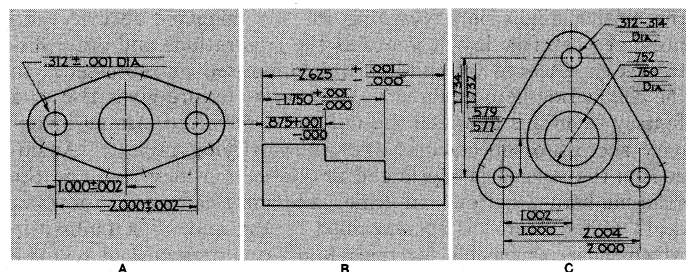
THREE METHODS OF INDICATING TOLERANCES: (A) BILATERAL DIMENSIONING; (B) UNILATERAL DIMENSIONING; (C) LIMIT SYSTEM
